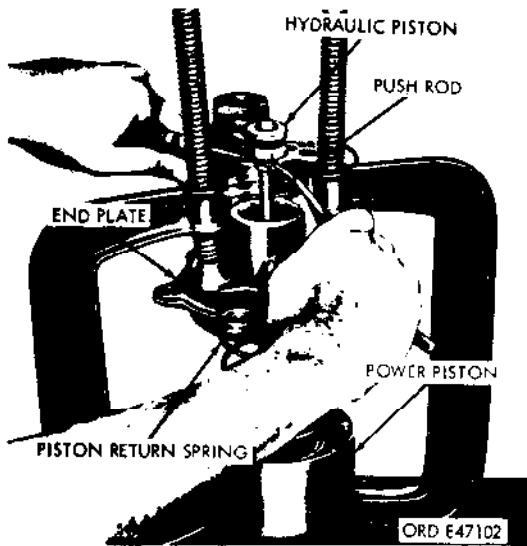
Removing or installing hydraulic piston for air-hydraulic (Air-Pak) power cylinder
